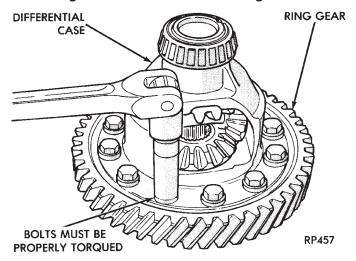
Remove or Install Ring Gear Bolts and Ring Gear
